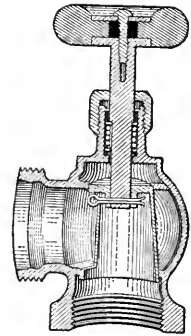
QUICK-OPENING HOT-WATER RADIATOR VALVE.
